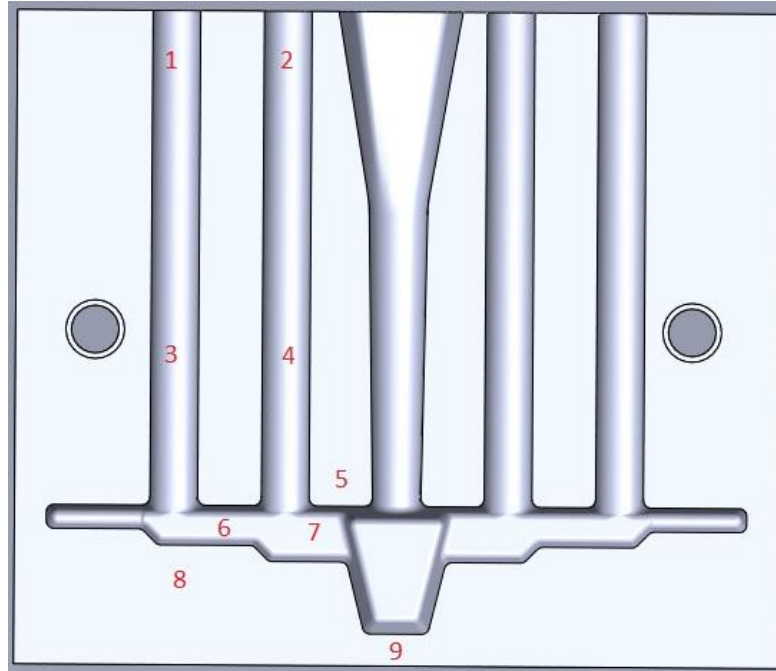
Thermocouple positions in the cylinder mold for measuring mold and melt temperatures during casting. The cylinders are 0.75 in (19mm) diameter and 7.5 in (109.5 mm) long.
